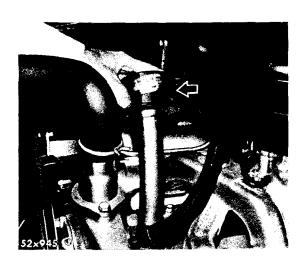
Crankcase Oil Filler Pipe Air Cleaner
